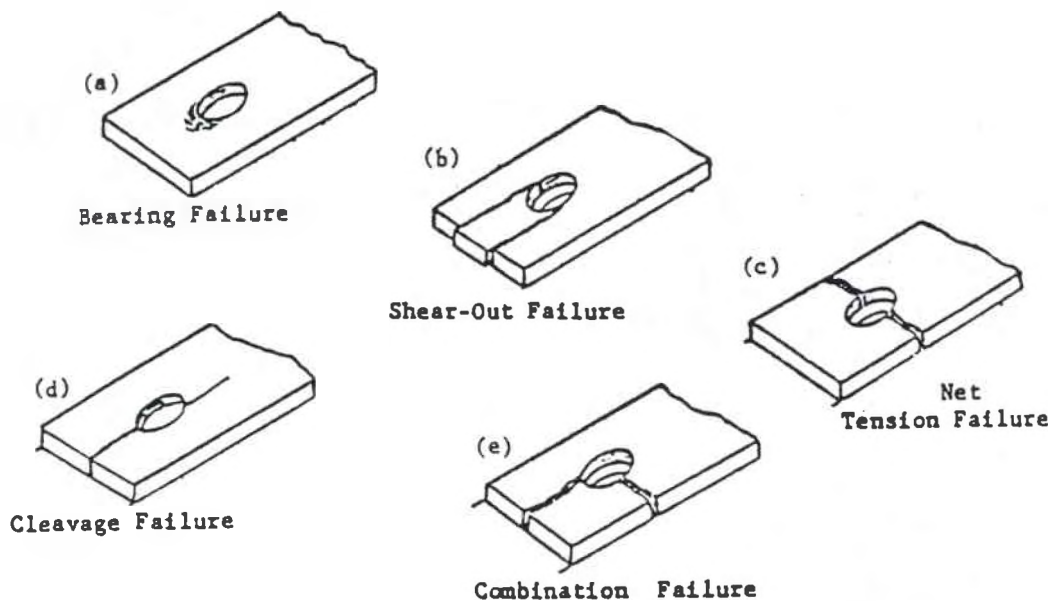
Macroscopic failure modes of bolted composite joints [75].
